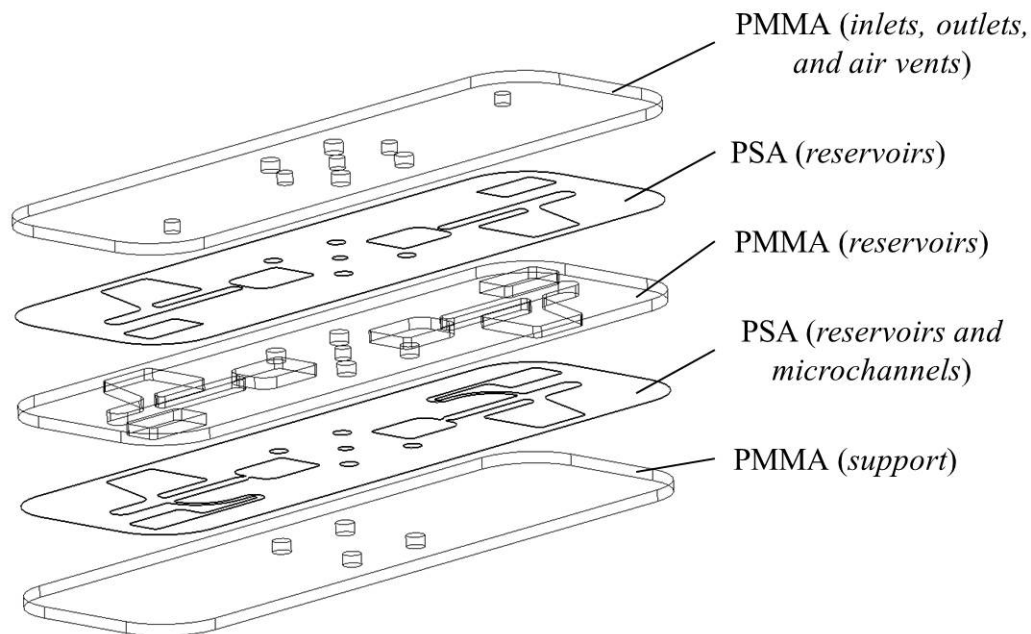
Centrifugo-pneumatic pumping chip design exploded view.
